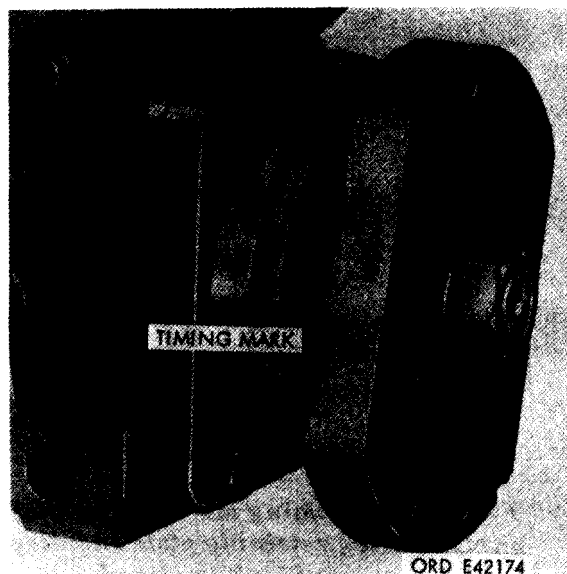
Removing or installing fuel injection pump timing hole plug.
